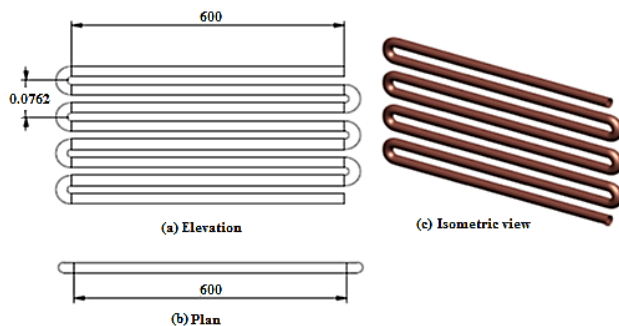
Schematic of a row of horizontal tubes used in the experiments; (a) Elevation, (b) Plan and (c) Isometric view
